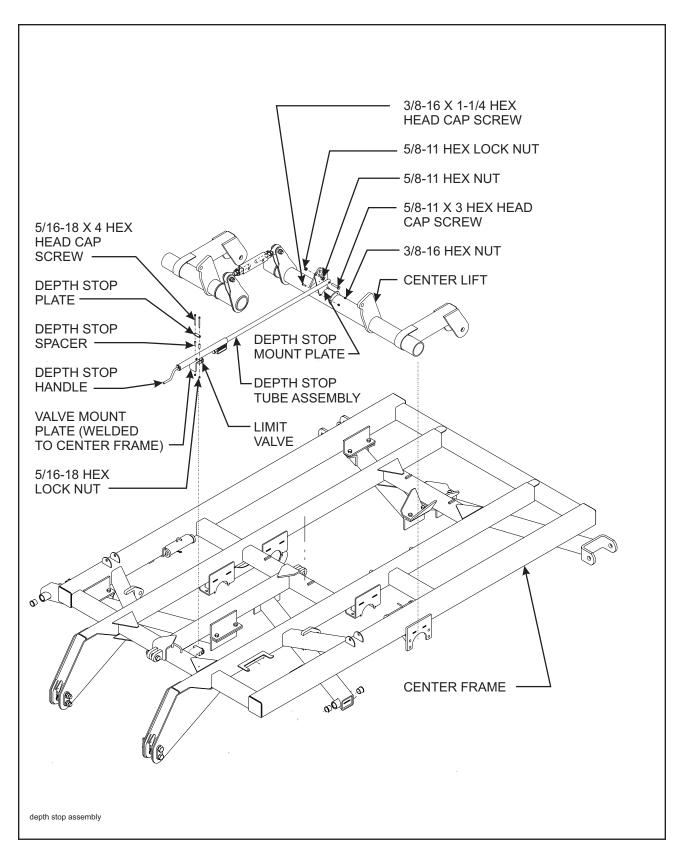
Hydraulic Depth Stop Assembly Installation
